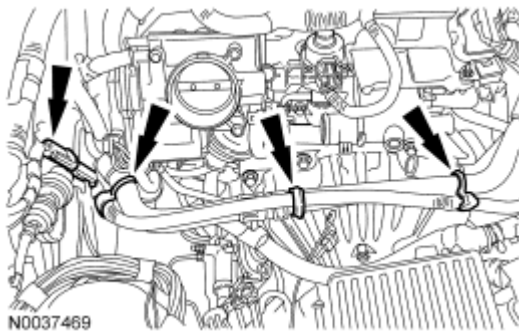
Locating Block Heater Electrical Connector Harness Retaining Clips
